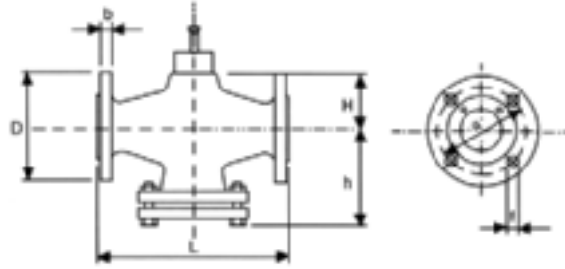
Two-Way Valve Body Dimensions, shown in inches (mm).
